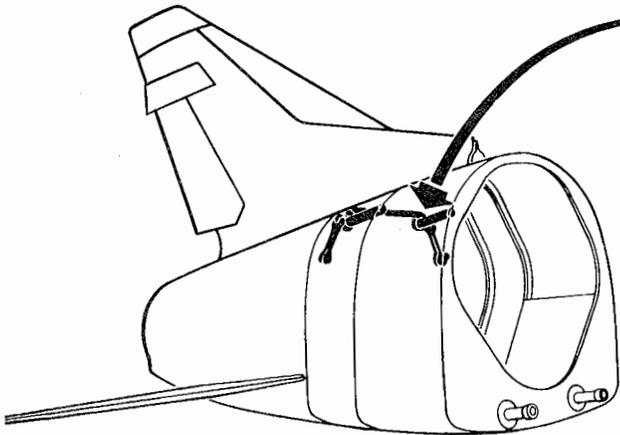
Assembling and Installing Aft Engine Mount Torsion Bars (Sheet 1 of 3)
